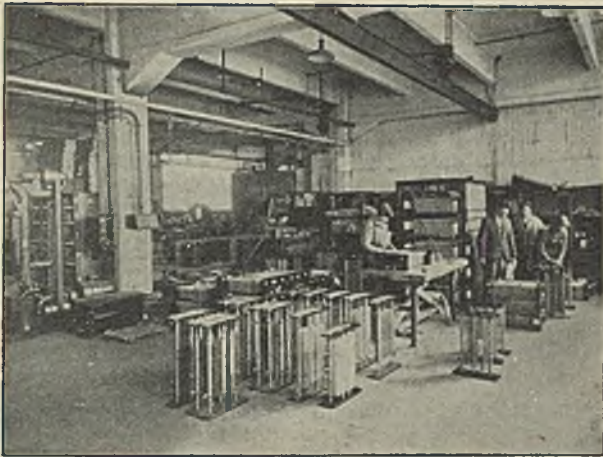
Finishing and Testing Unbreakable Resistances.
